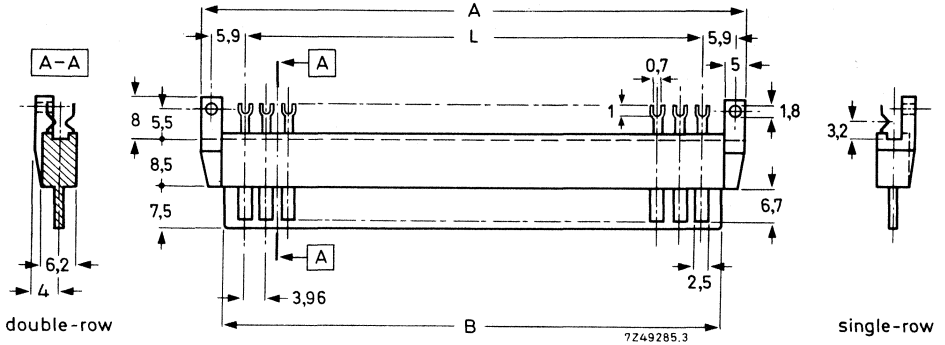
Printed-wiring interconnector; see Table 2 for dimensions A, B and L.
